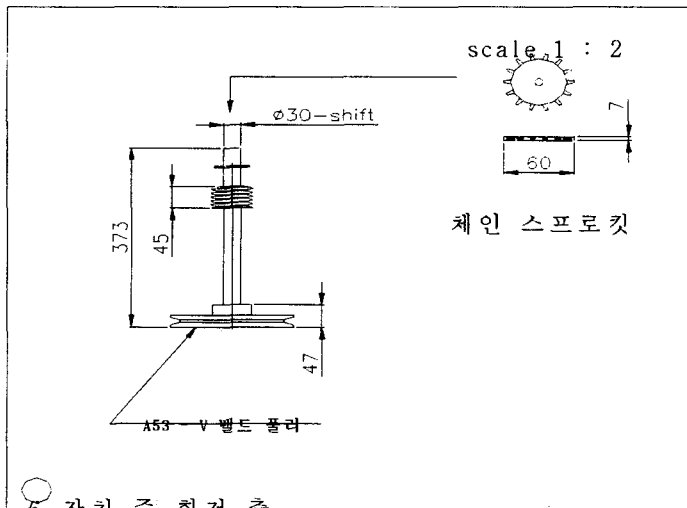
Shaft of bucket elevator in developed garlic separator
